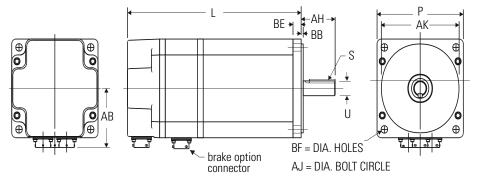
N-3400, N-4200, and N-5600 Mounting Dimensions
